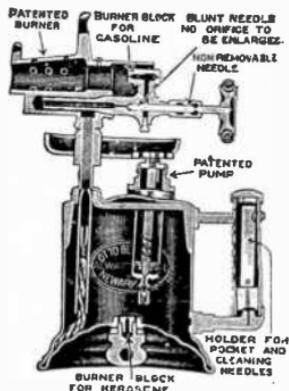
,203.—Bernz gasoline torch with holder for heating soldering bits.
